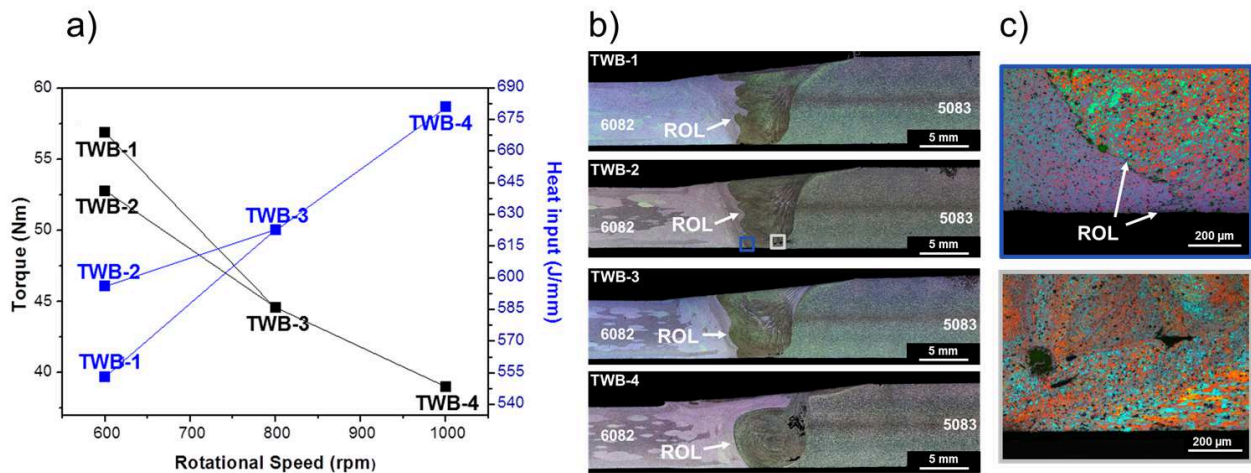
Effect of process parameters on torque and heat input for all weld experiments (a), cross-sectional view of the TWB welds (b), and details of the ROL and defect at SZ (c).
